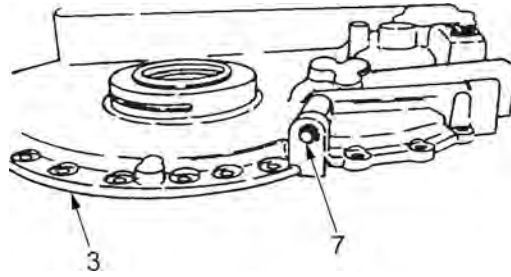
Pipe Plugs, Left Cover Assembly, Removal, View 2.
